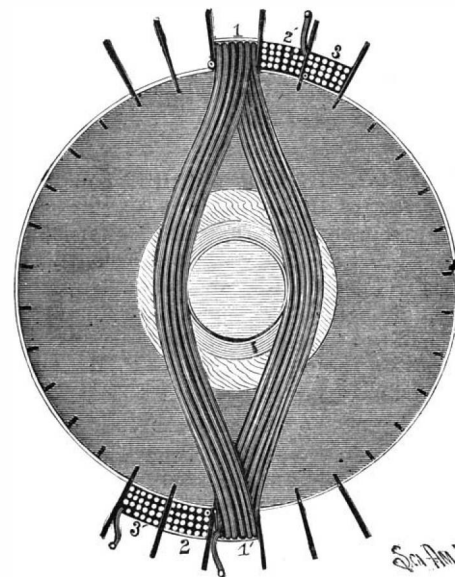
ARRANGEMENT OF THE LAYERS AT END OF ARMATURE CORE.
